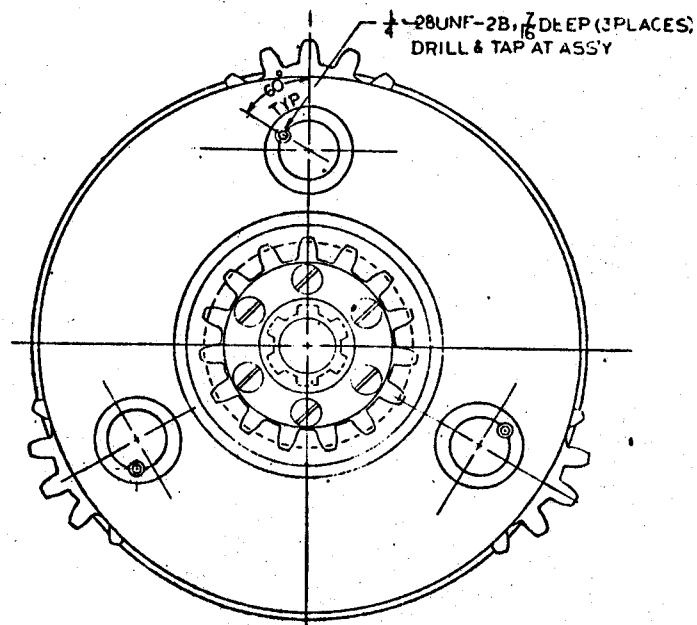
FIG. , CARCO MODEL P-60, PLANETARY WINCH ASSEMBLY, 43275-2
